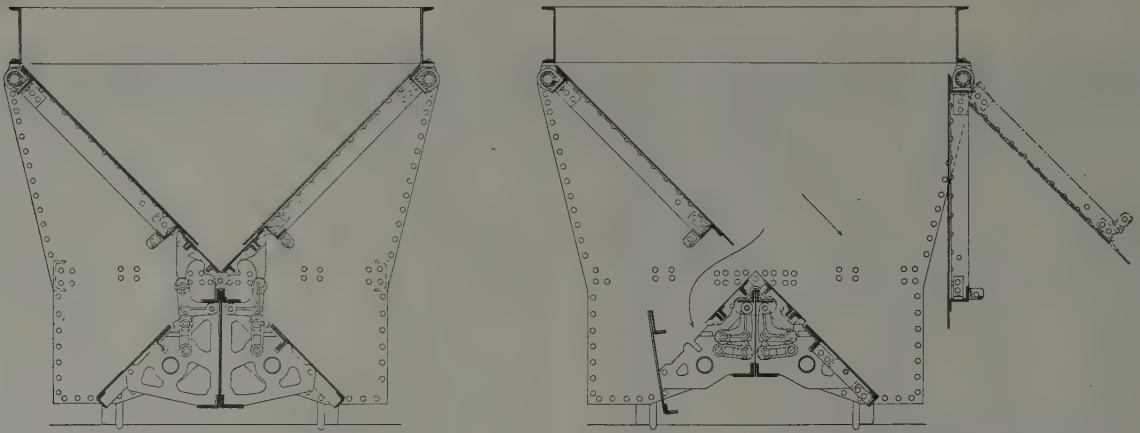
Door Positions of the Gilman-Taylor Car Shown in Fig. 137. Goodwin Car & Manufacturing Company.
